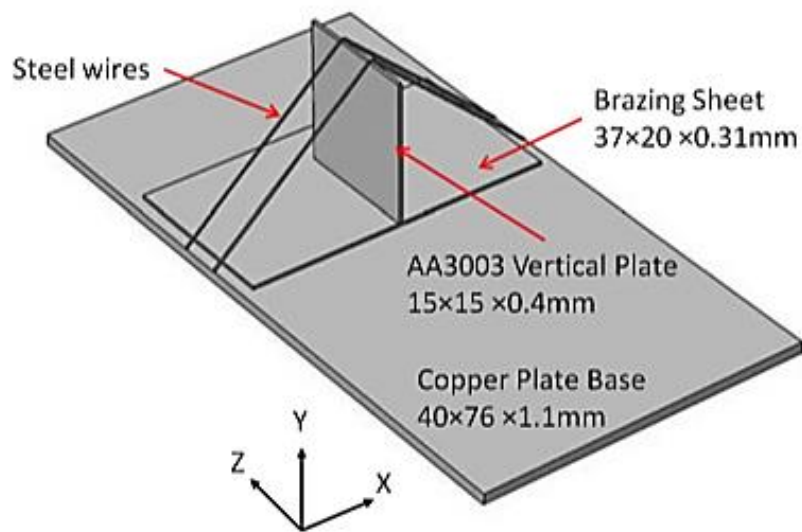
Wedge-tee sample 3-D configuration of 0.03 thickness Trillium™ clad metal
